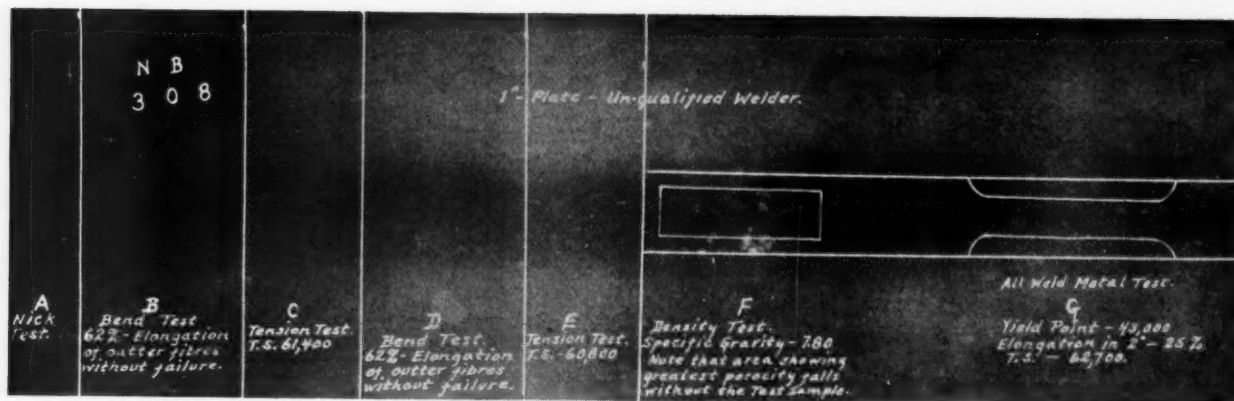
Radiograph of a 1-inch plate weld made by an inexperienced welder during a qualification trial. This weld contains considerable porosity as shown.
